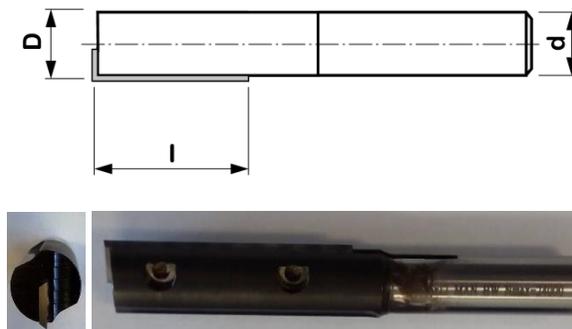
End mill KARNED 4451 fitted with one replaceable carbide blade (D – cutting diameter, L – cutting length, d - diameter of the chucking shank)
